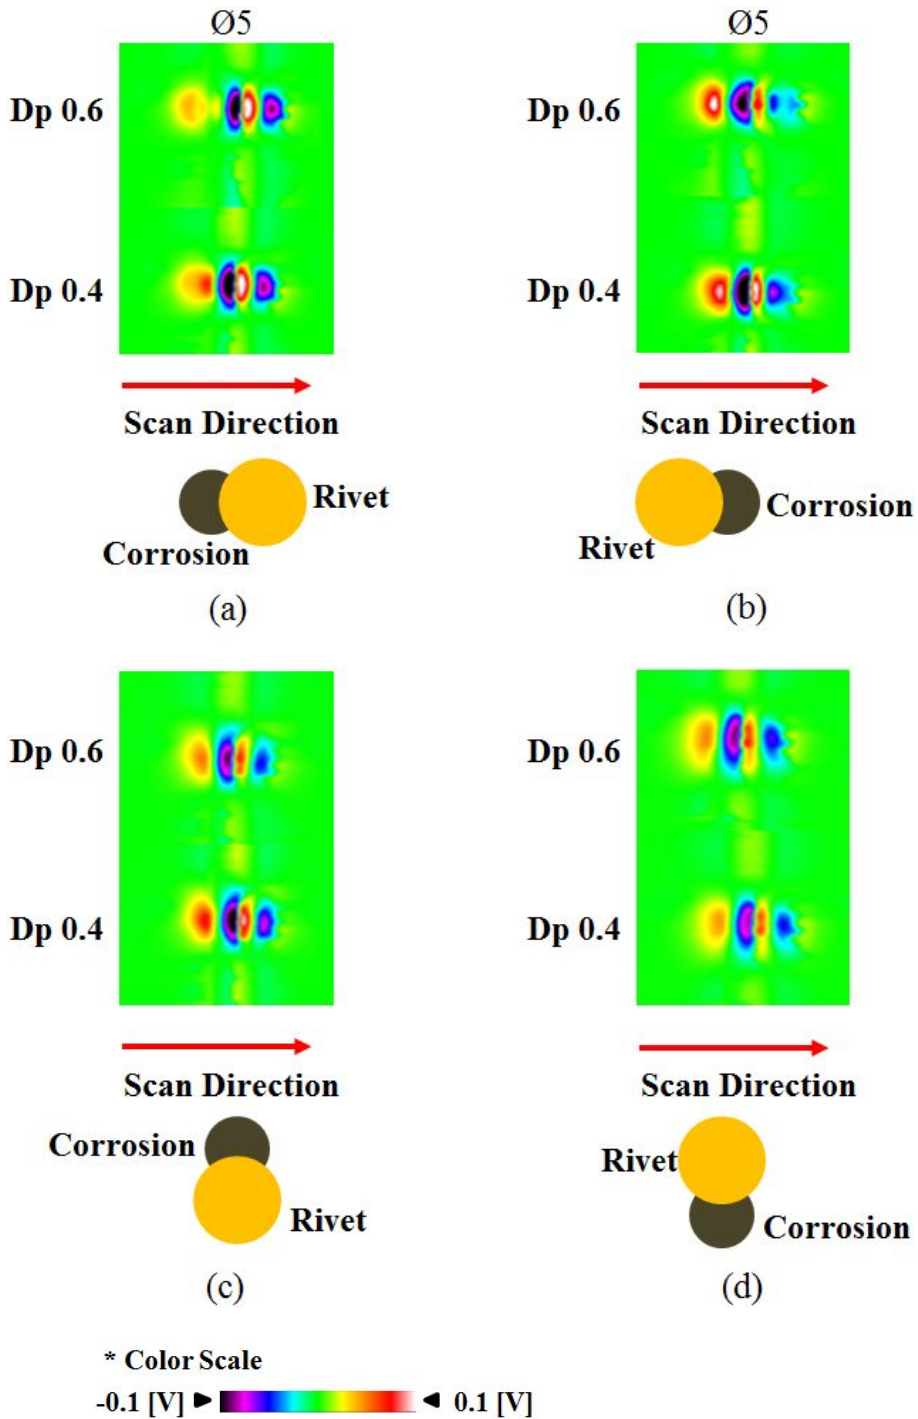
18 Images of a rivet with four direction corrosion (flat)
